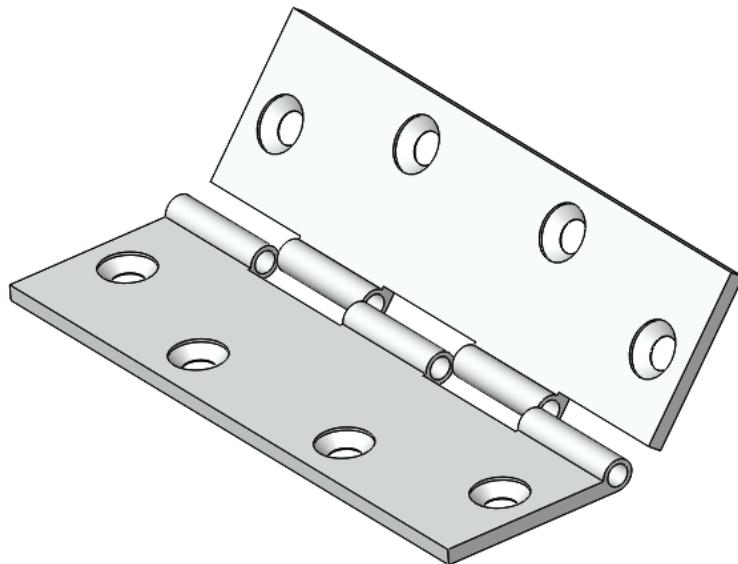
Ferrarer, Auston: Assembly Step 1
